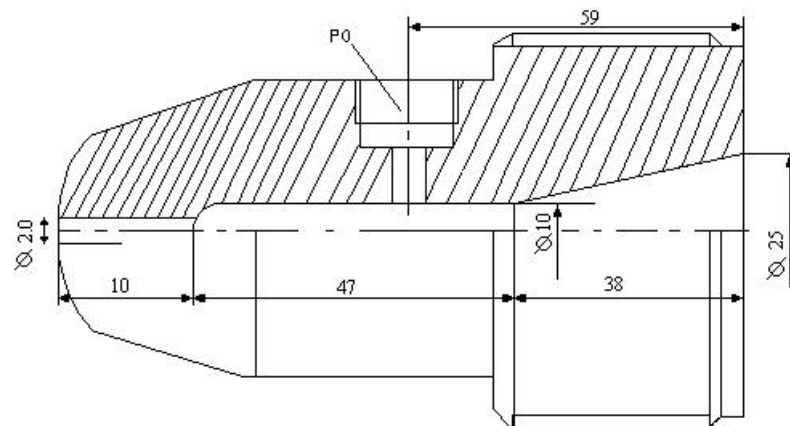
Drawing of the nozzle used to produce the spider gated tube
